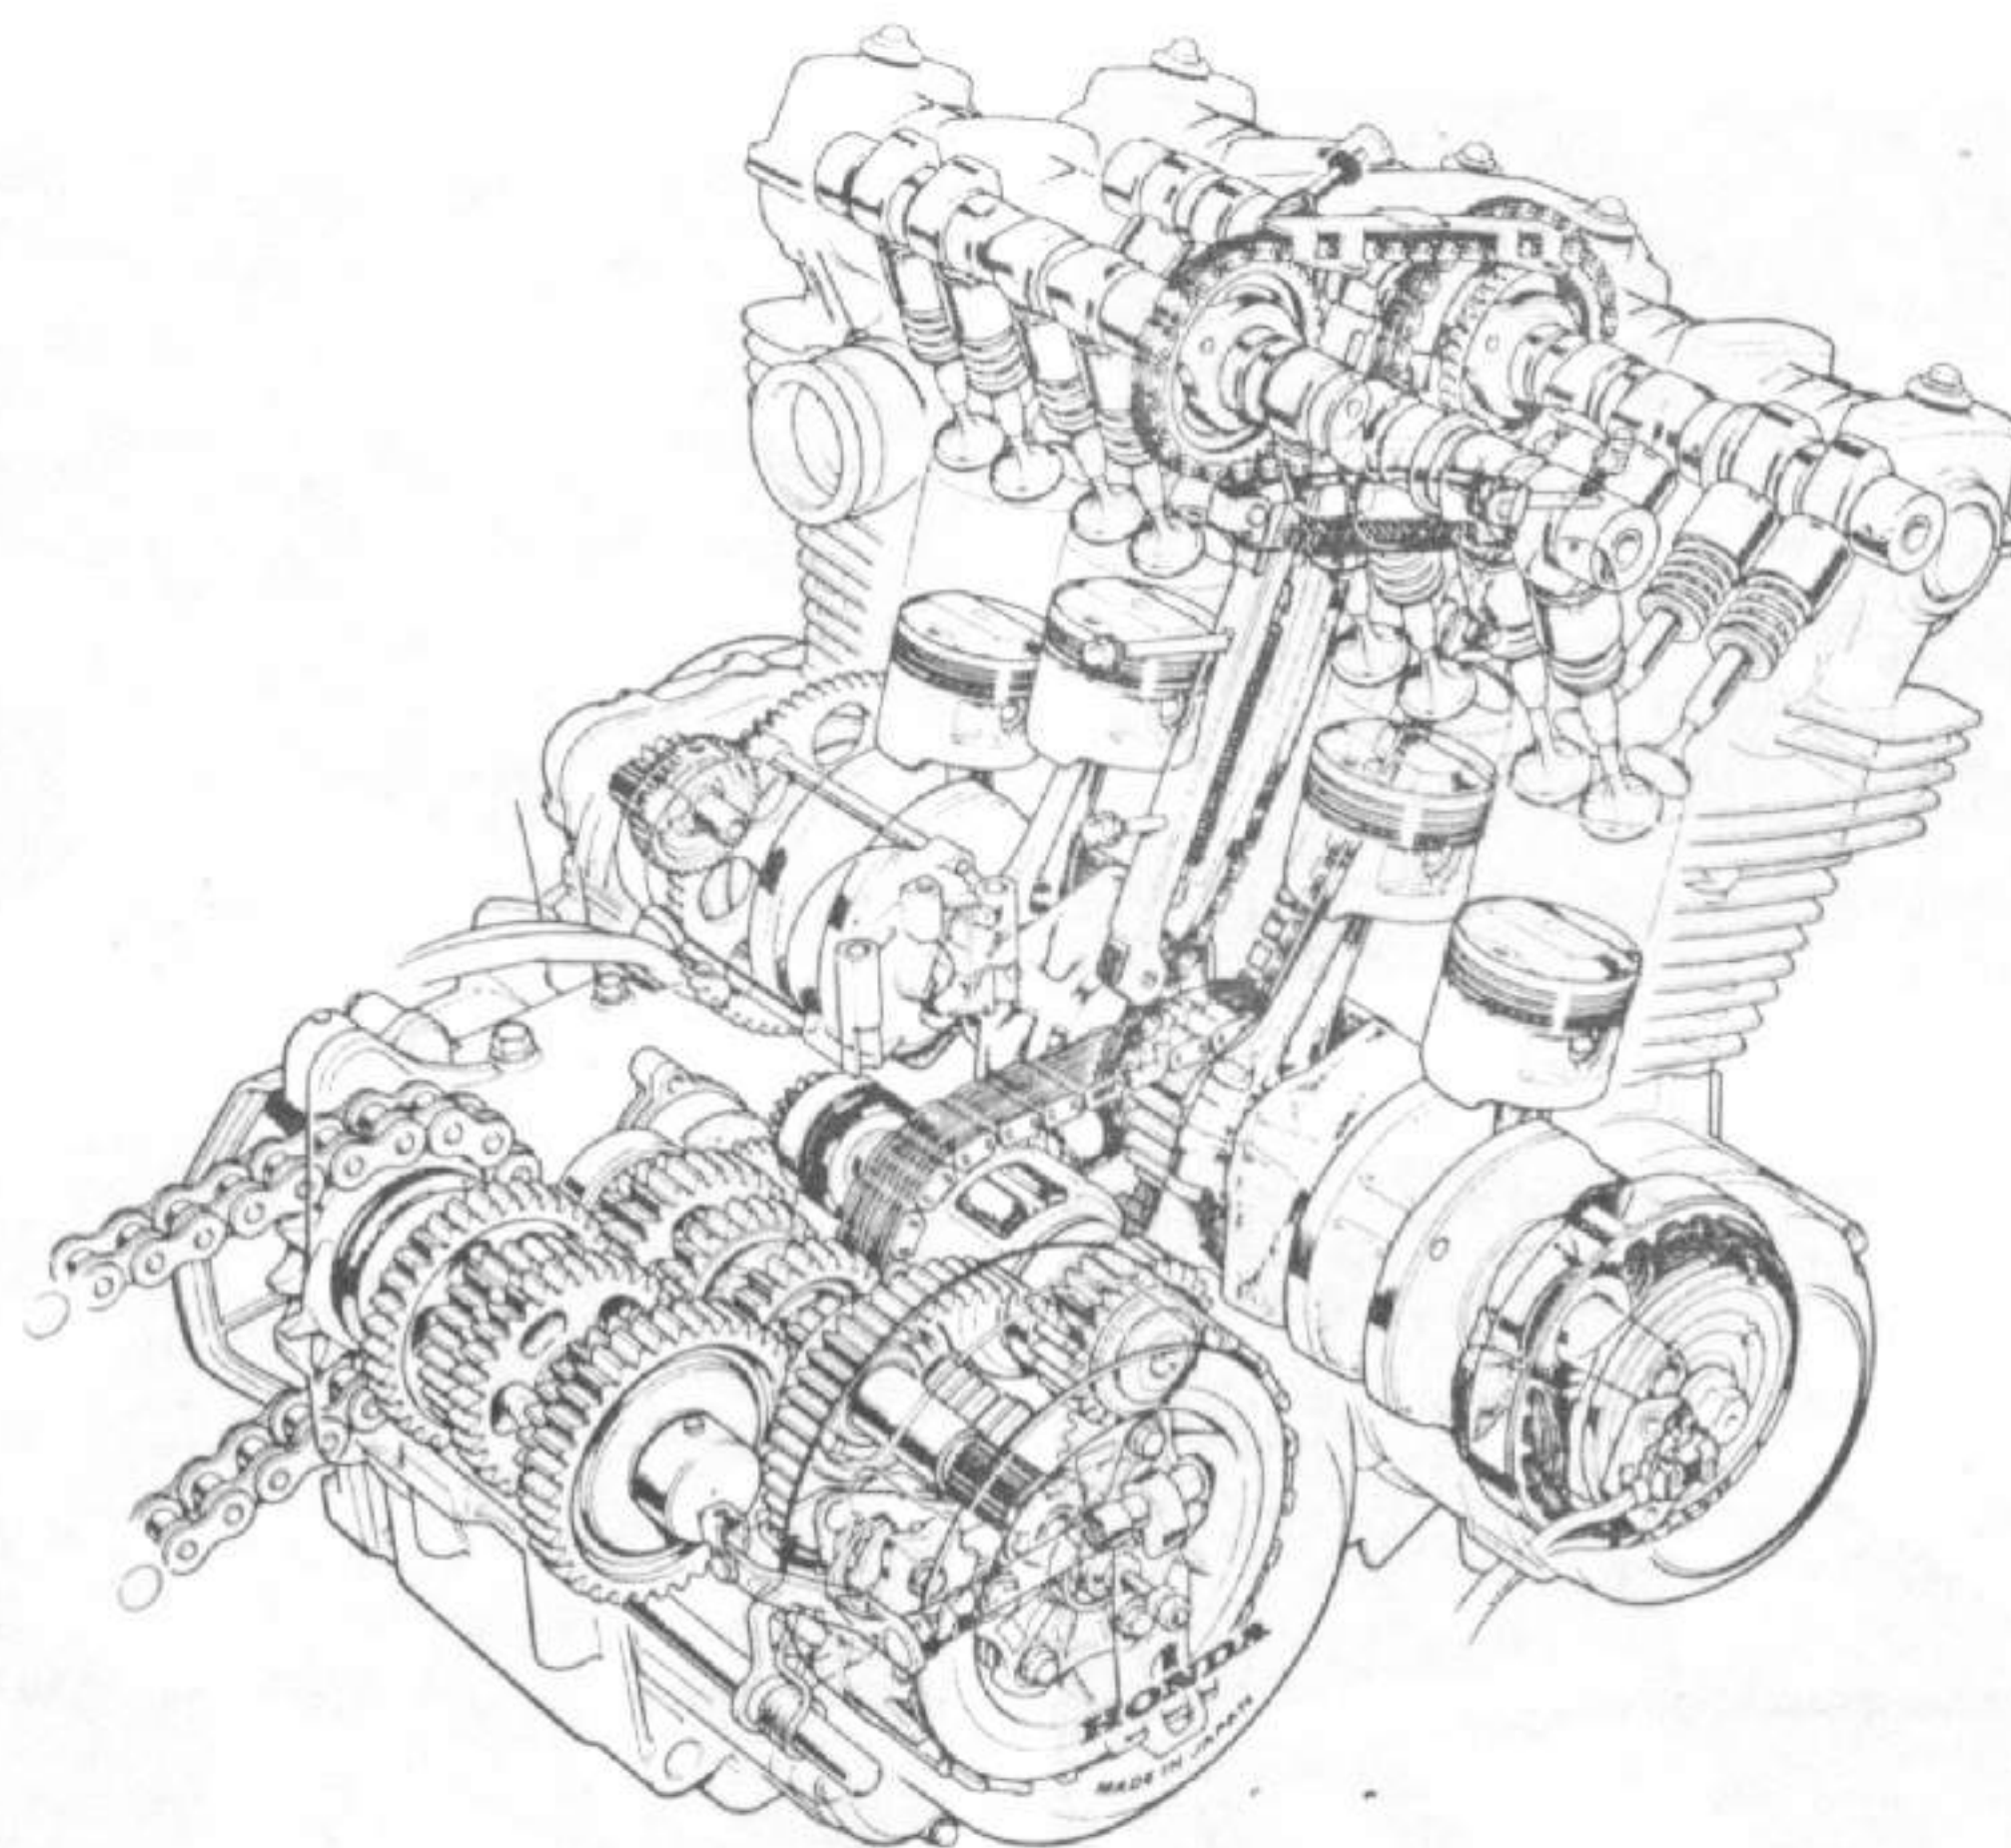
Sectioned view of engine/gearbox unit,
